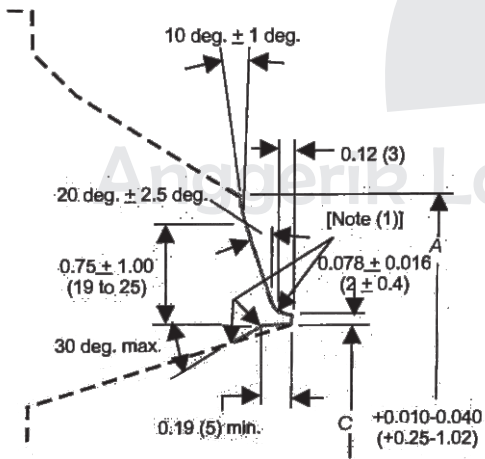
FIG IV WELD BEVEL DETAILS FOR GTAW ROOT PASS
